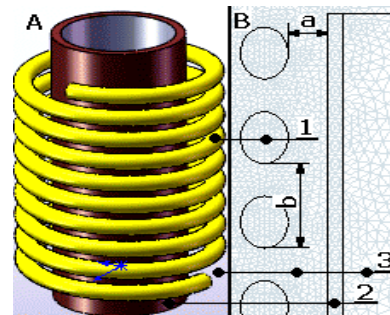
Geometrical model of the designed system inductor- workpiece: A – three dimensional model; B – two dimensional model; 1- inductor; 2- workpiece; 3- outside environment; a – distance between the workpiece and the inductor; b – winding step
